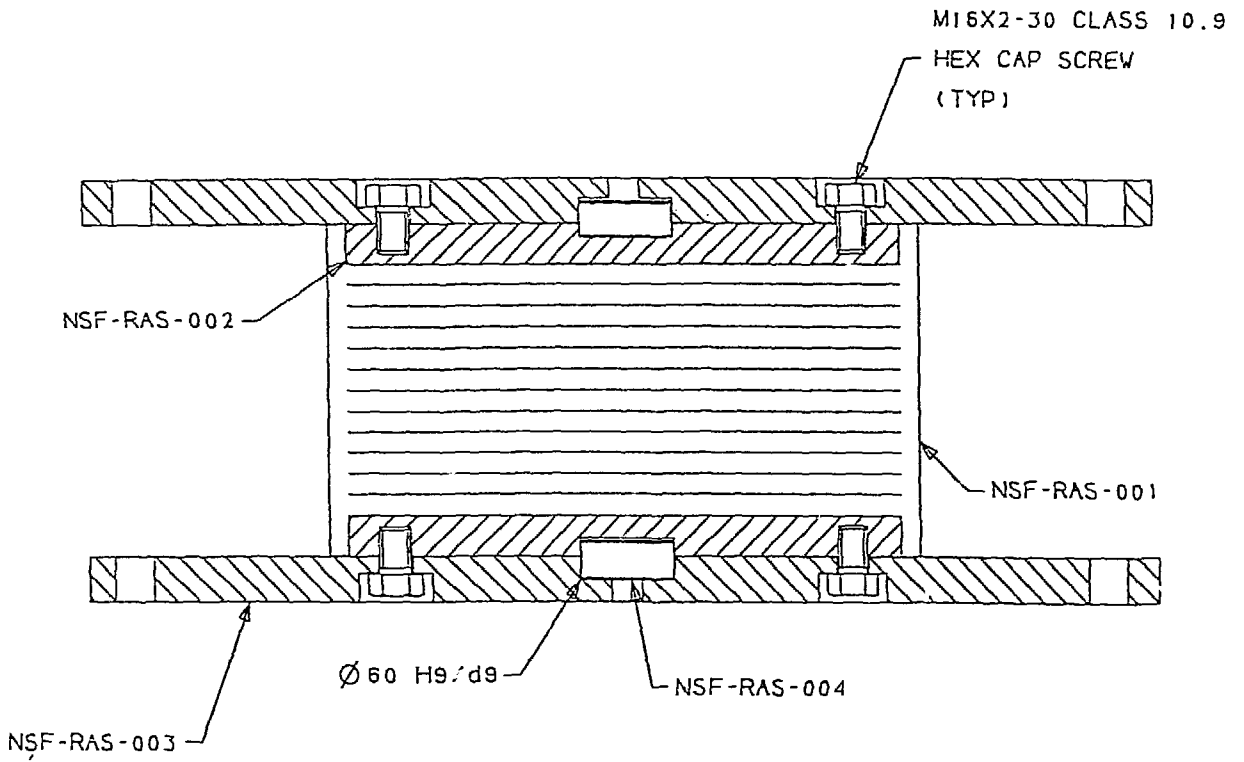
Assembly Drawing for a Typical Steel Laminated Isolation Bearing
